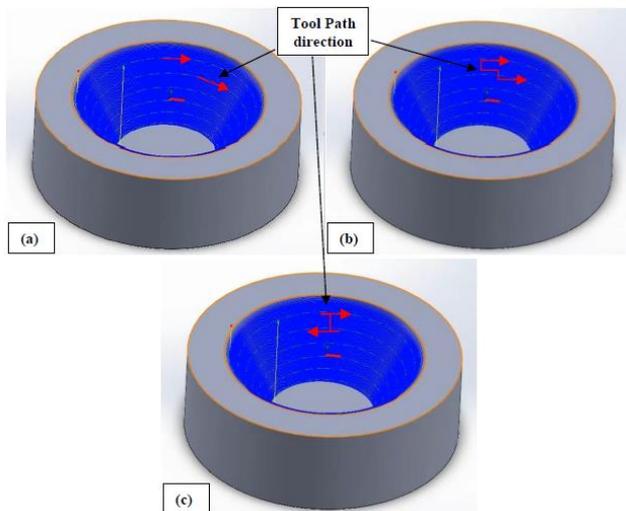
Types of adopted tool paths (a) Helical path (P_1), (b) Iso-planar path (P_2), (c) Bi-directional iso-planar path (P_3)
